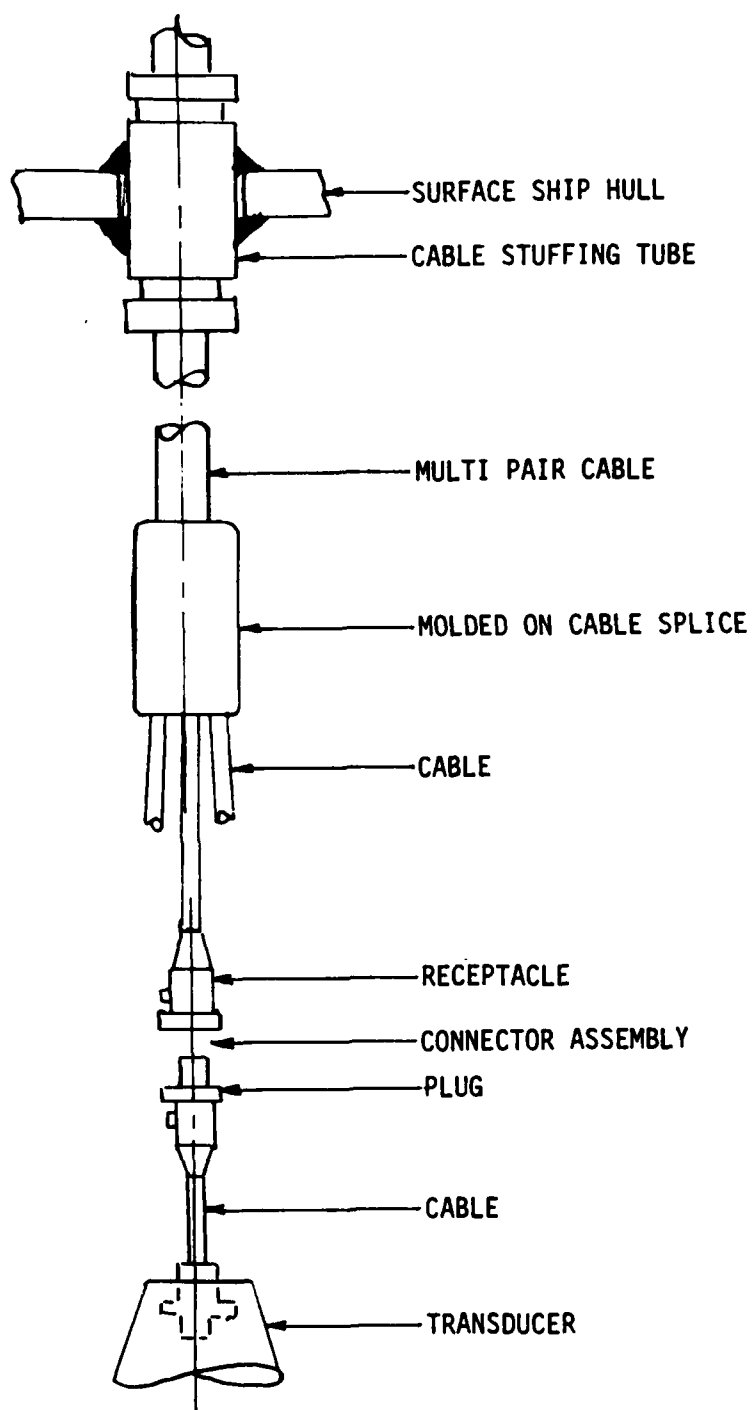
TYPICAL SURFACE SHIP CABLE HARNESS ASSEMBLY
